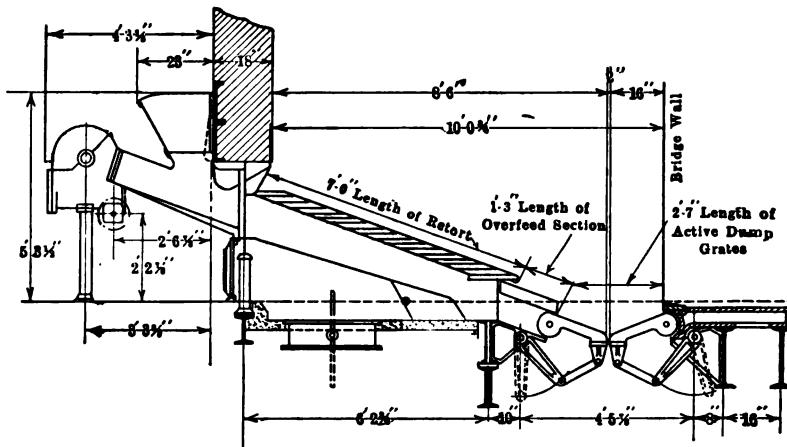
Dimensions of Westinghouse Underfeed Stoker.
